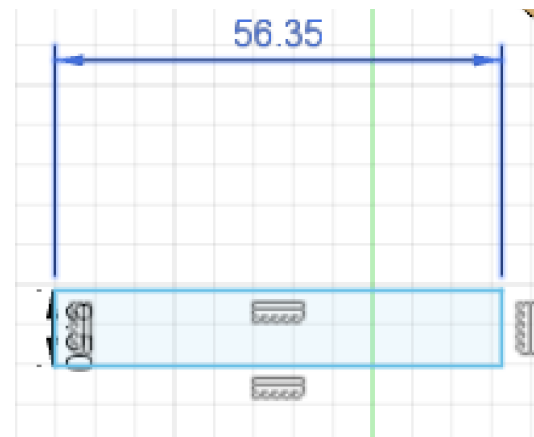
One of the four rectangular sections after cutting, shown in drawing form to show dimensions (9.5 mm by 56.35 mm).
